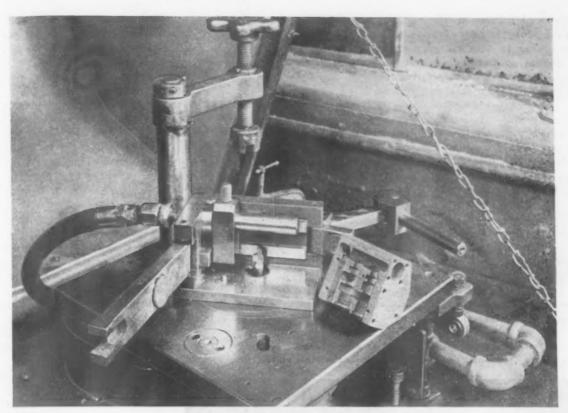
Recessing, or undercutting machine, showing holding fixture, recessing tool, and cutaway of workpiece.
